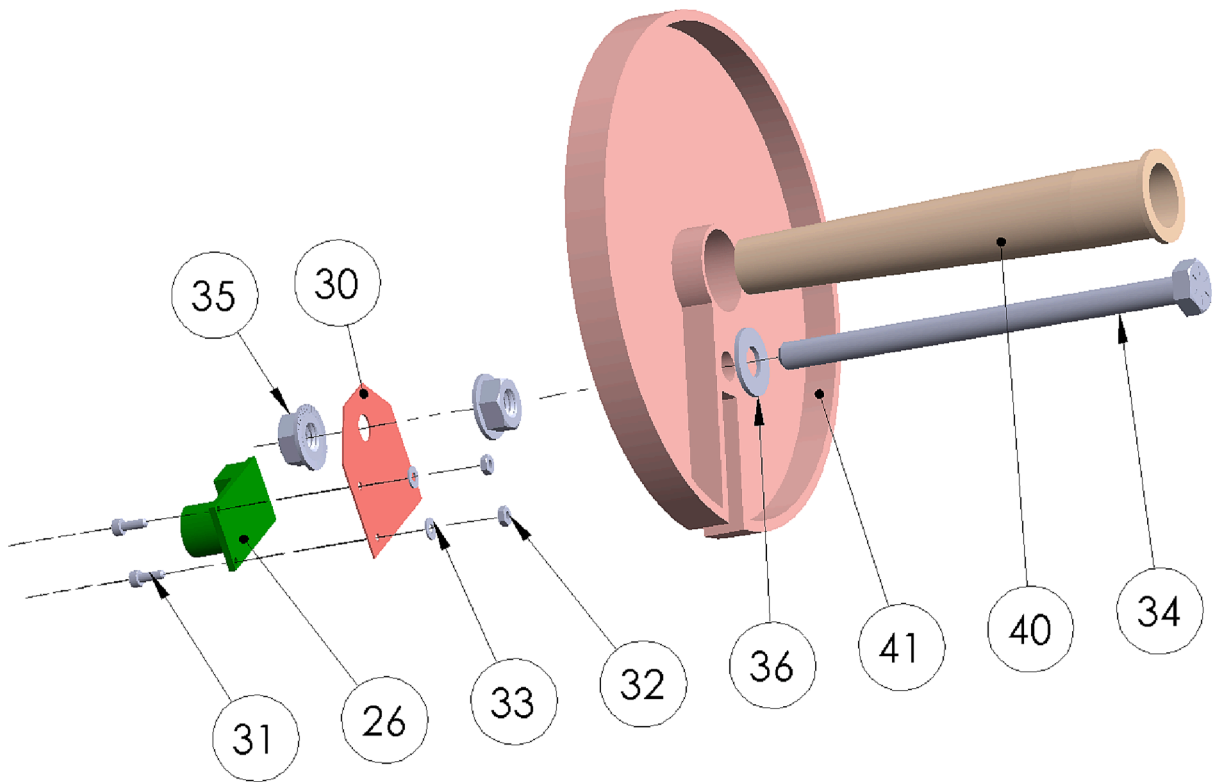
Spinneret assembly: Infrared Sensor assembly.
